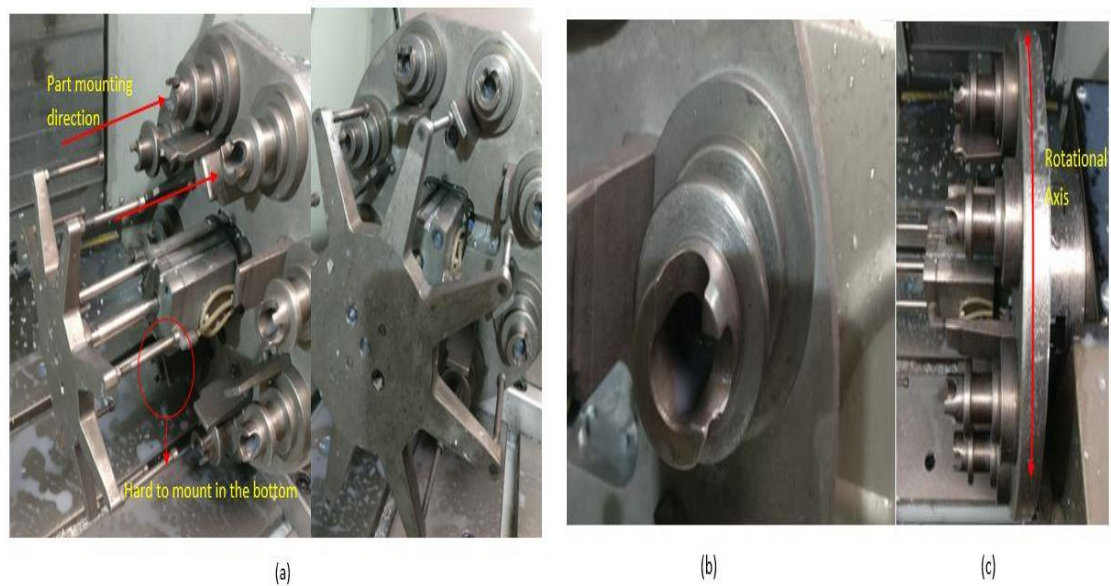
(a) Mounting direction and view of the old jig (b) Closed up view of the part holder (c) Rotational axis of the jig.
